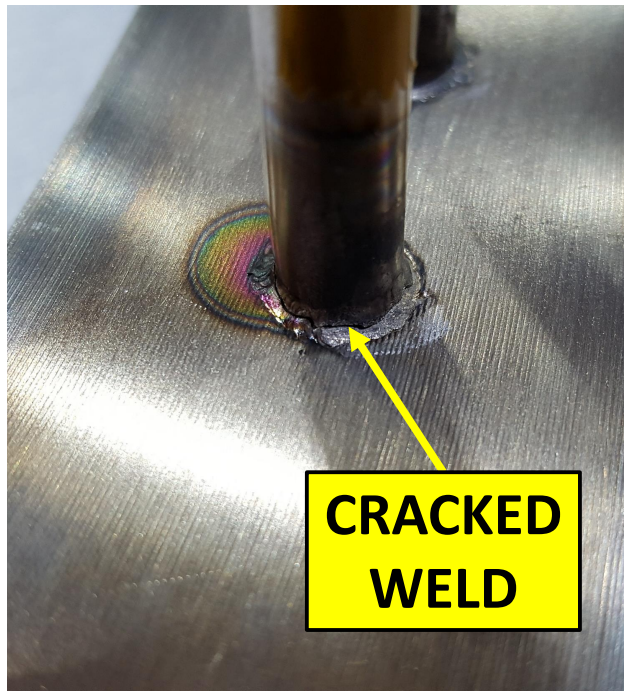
An example cracked anode weld found during the thruster inspection at GRC.
